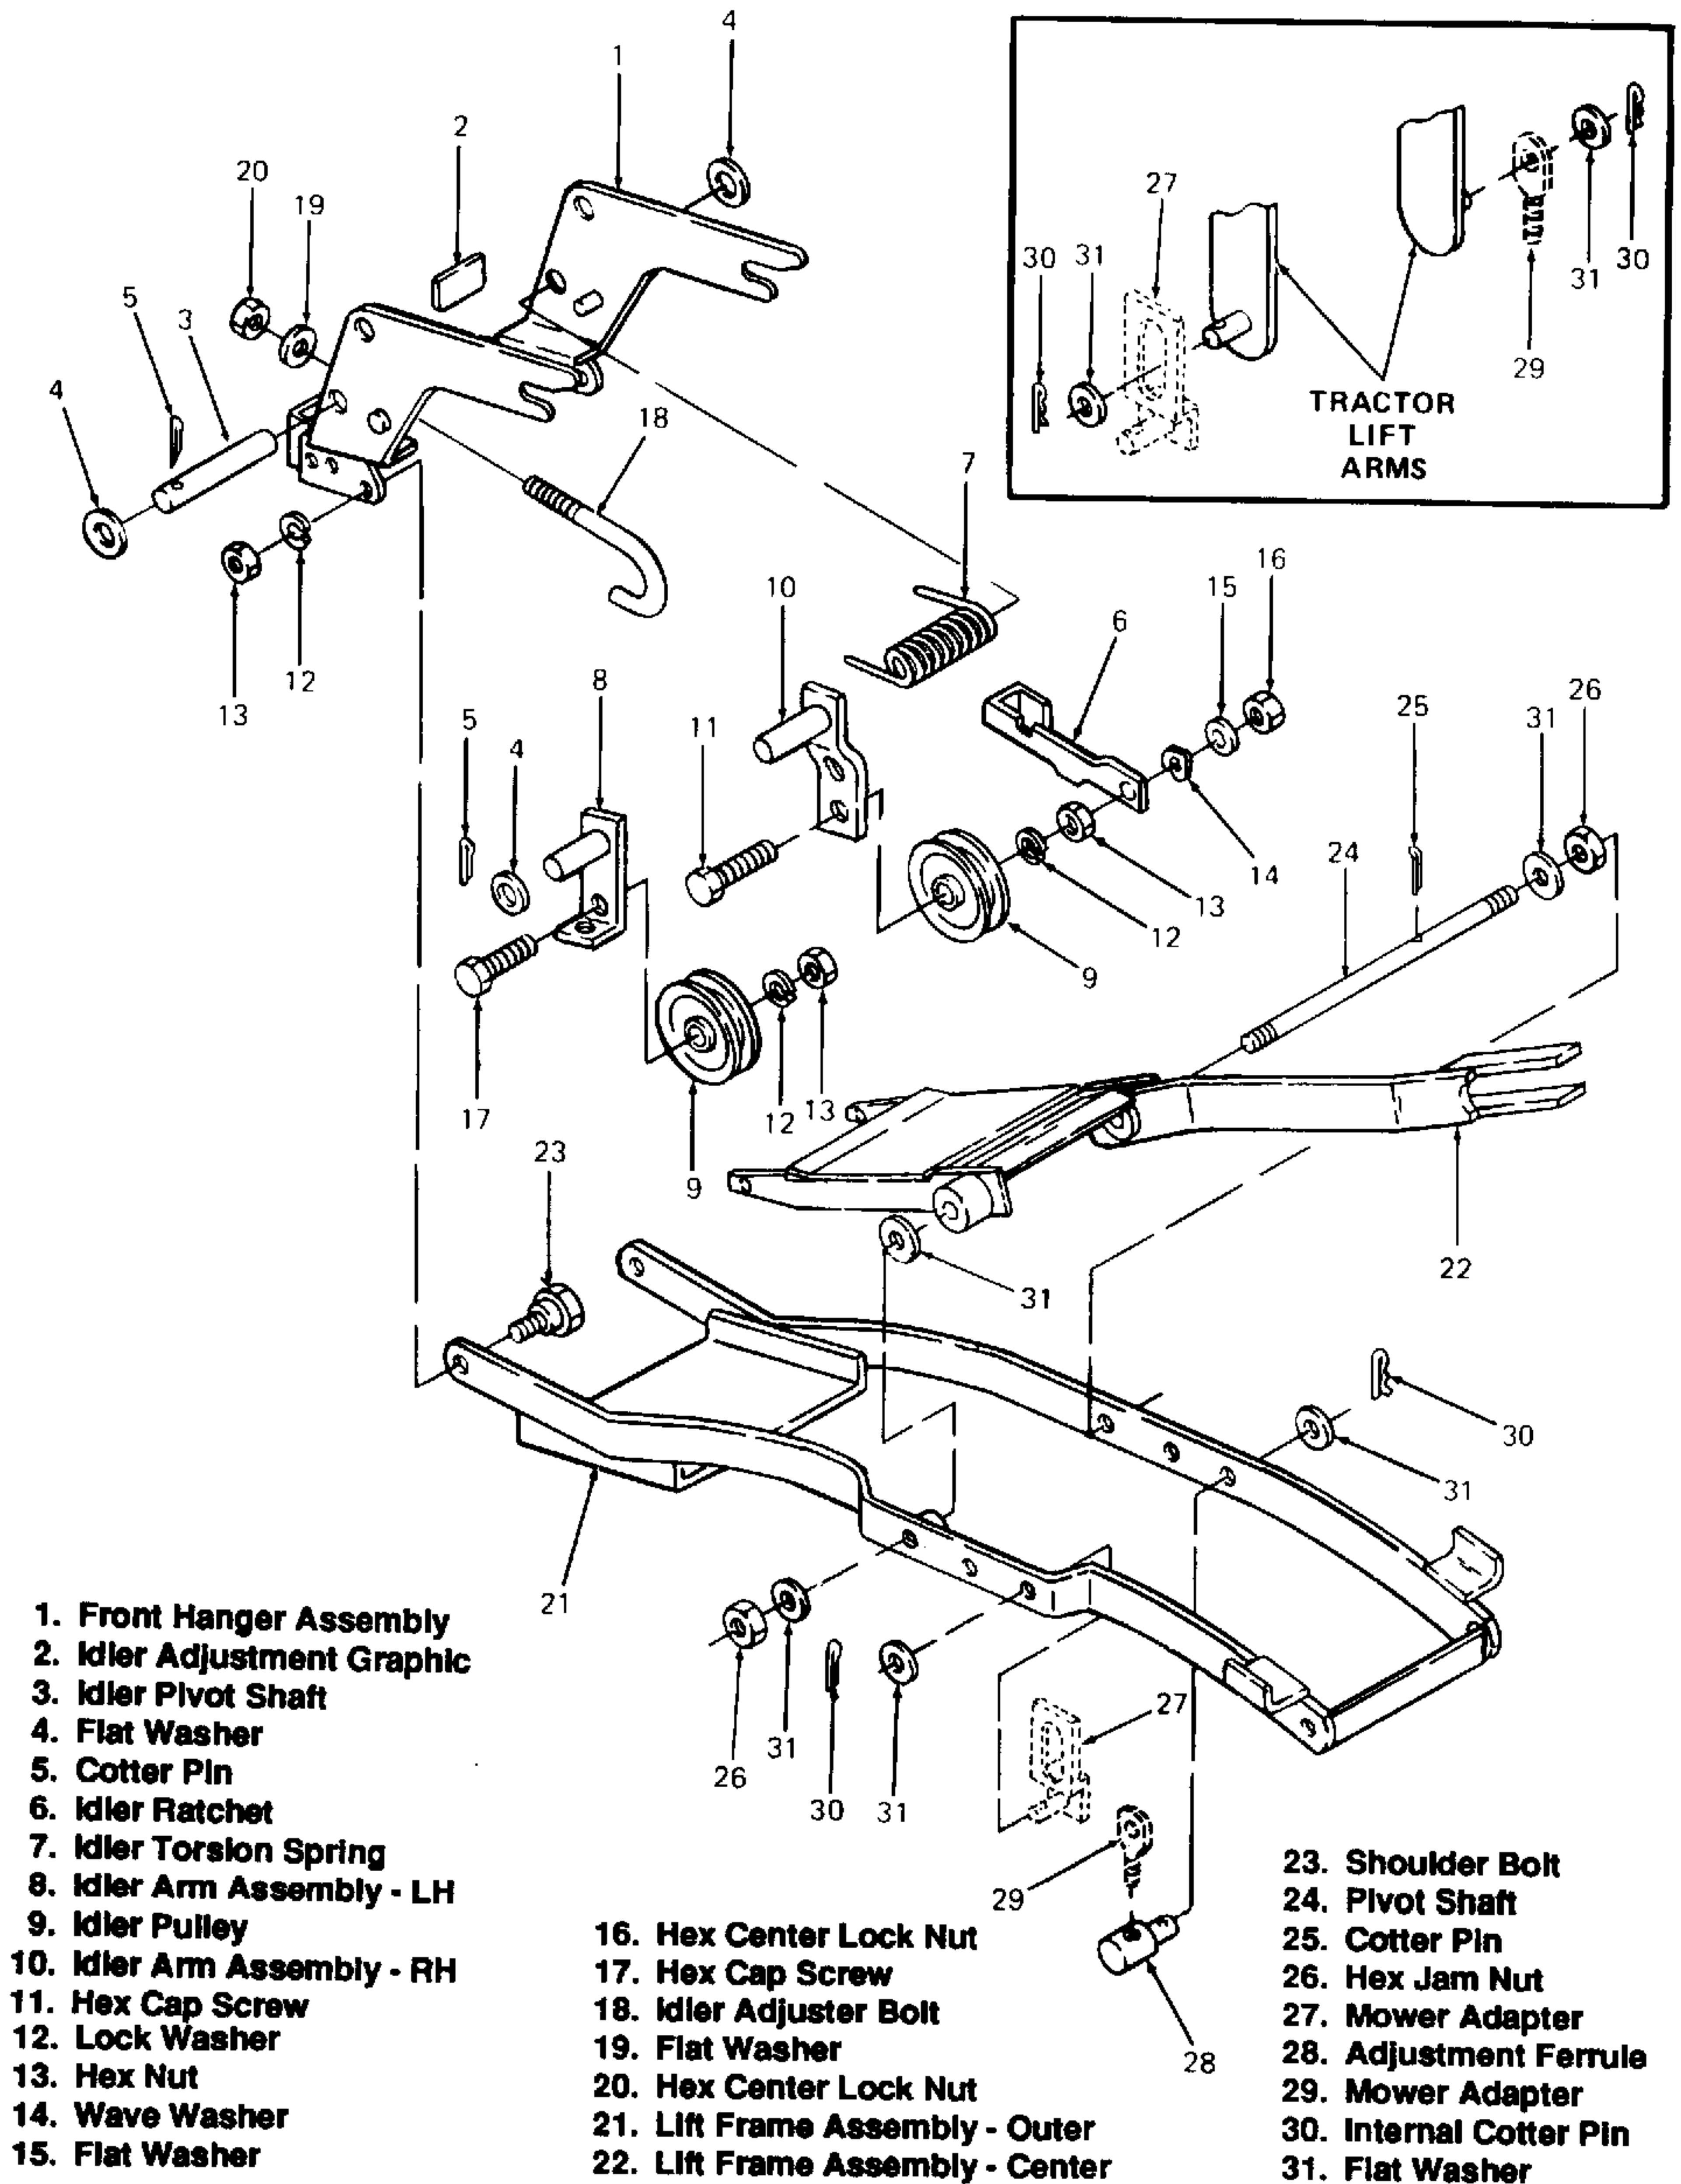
Hanging Frame and Mule Drive (Model 190-336).
